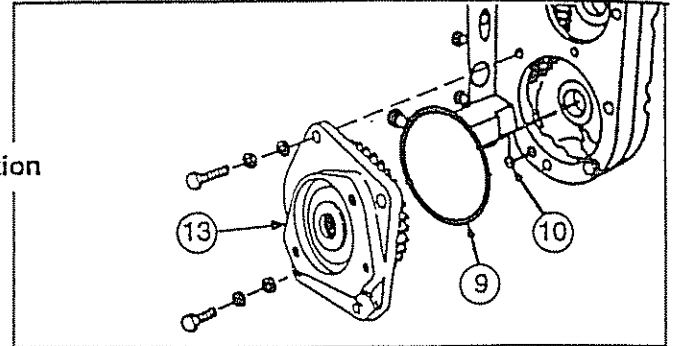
Fuel Transfer Pump Drive Gear Assembly Installation
